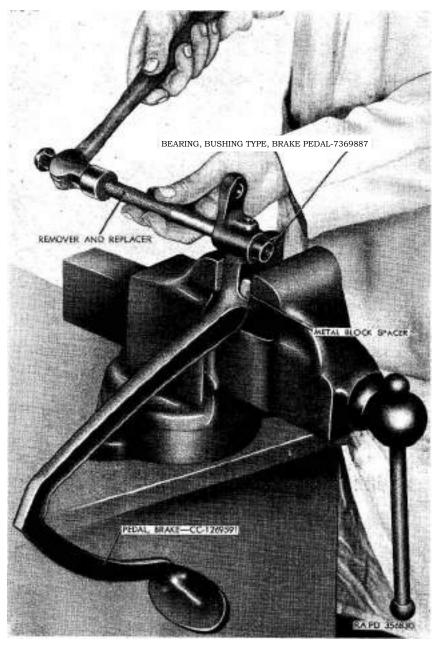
Removing brake pedal bushing-type bearing from brake pedal with a bushing remover and replacer.
